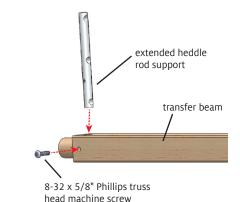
INSTALL EXTENDED HEDDLE ROD SUPPORT IN TRANSFER BEAM
